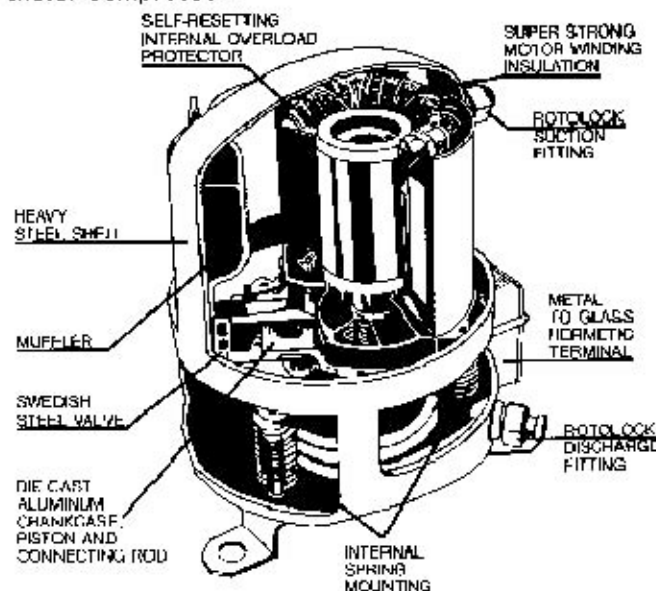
CUT AWAY VIEW COMPRESSOR
